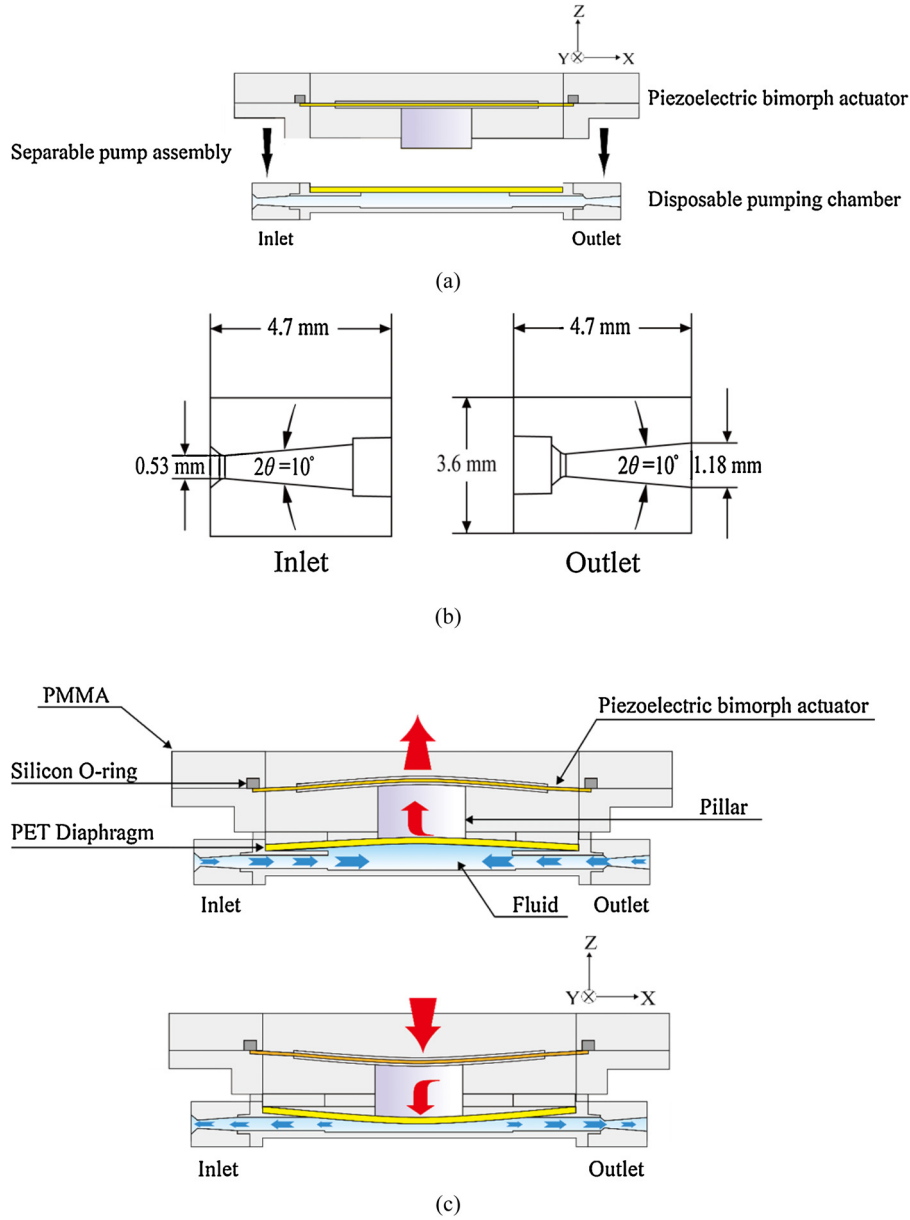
Structure of a circular miniature pump- (a) separable assembly of disposable pumping chamber and piezoelectric bimorph actuator, (b) a schematic view of nozzle/diffuser structure, and (c) cross-sectional view of pumping operation.
